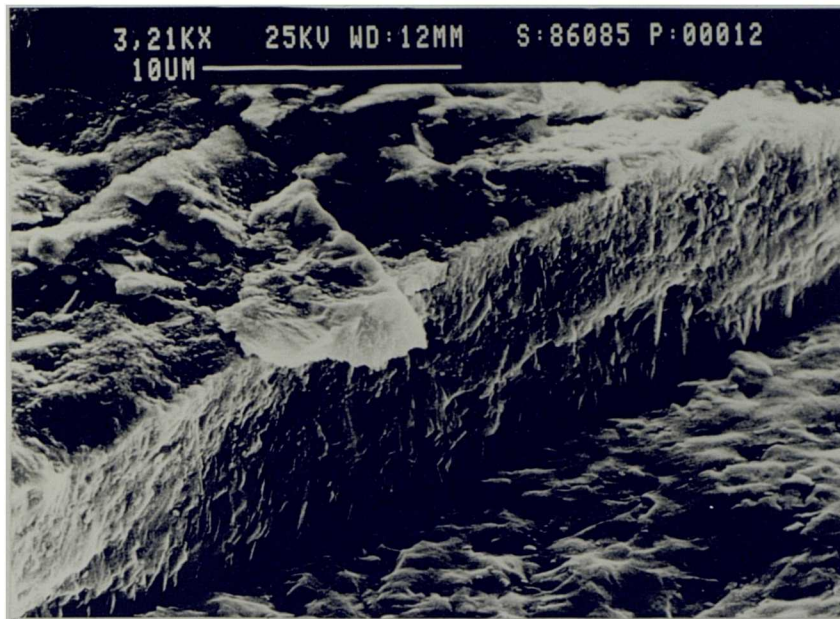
Crater formed in coated carbide tool (KC850) after separation of welded junction.
